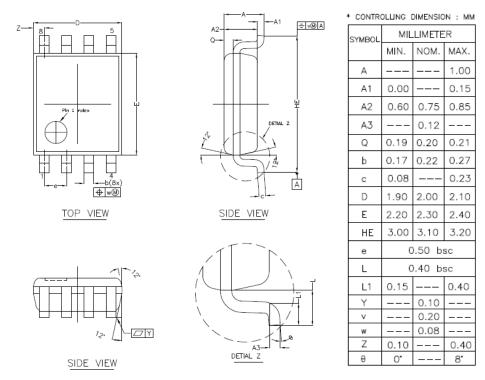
VSSOP8 Package Shape and Dimension in millimeters and (inches)
